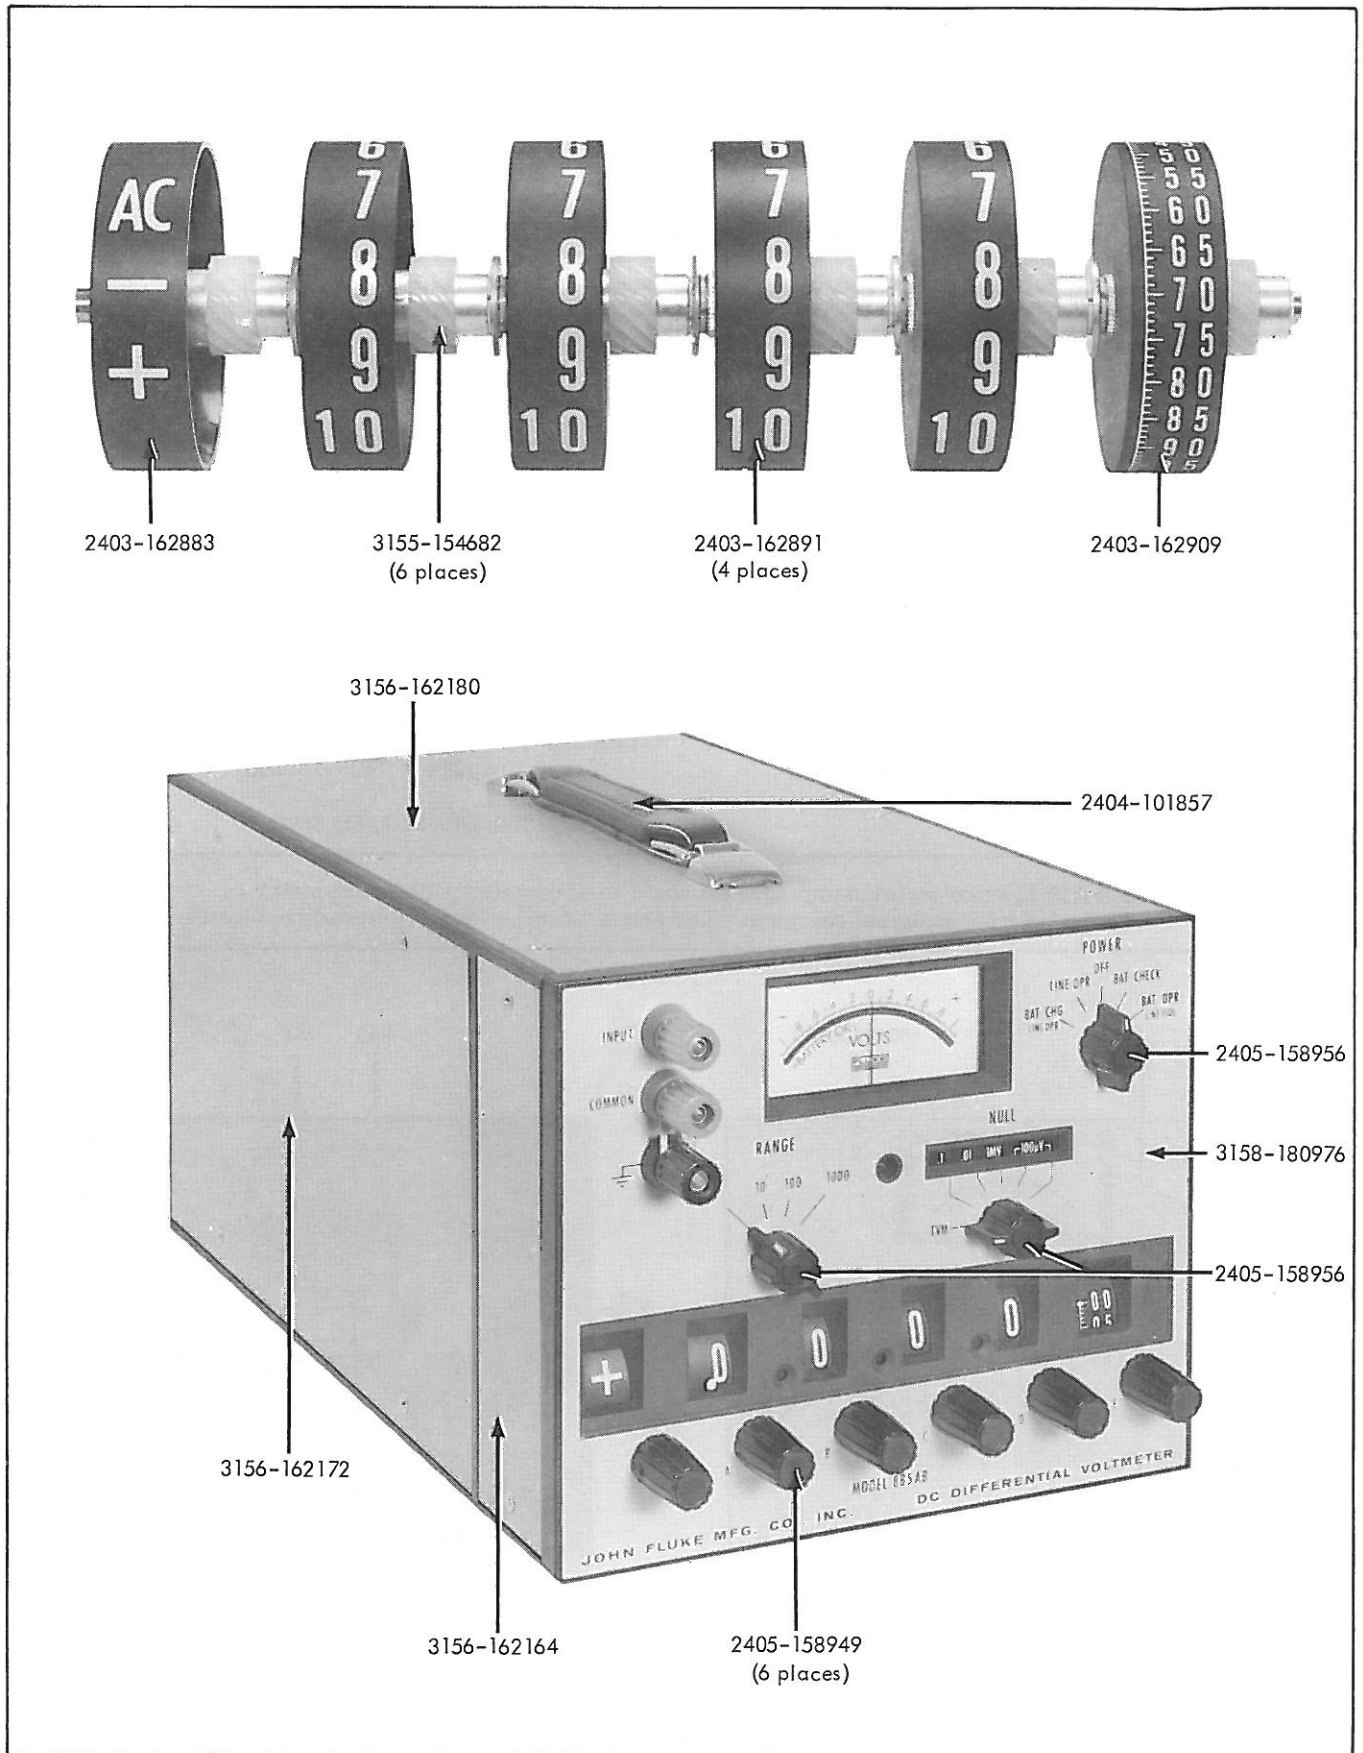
FINAL ASSEMBLY (Sheet 2 of 2)
